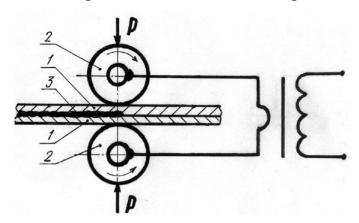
Scheme of resistance seam welding: 1 – work-piece; 2 – electrode-roller; 3 – welded seam
